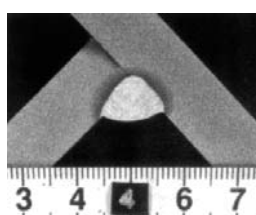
(left): Macrostructure of the fillet weld shown in Figure 1, having sufficient penetration and smooth fusion with the base metal
